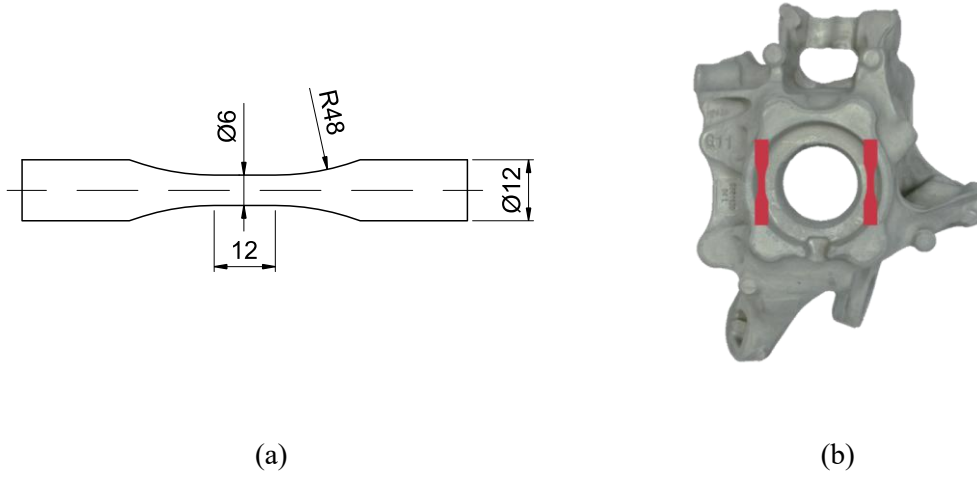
a) Fatigue specimens' dimensions and b) location in the LPDC knuckle arm from where they were obtained
